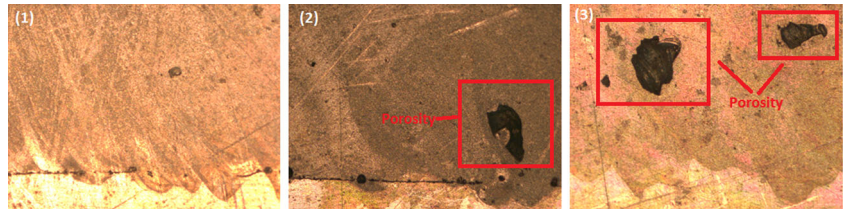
Horizontal cross section view of weld on stainless steel
